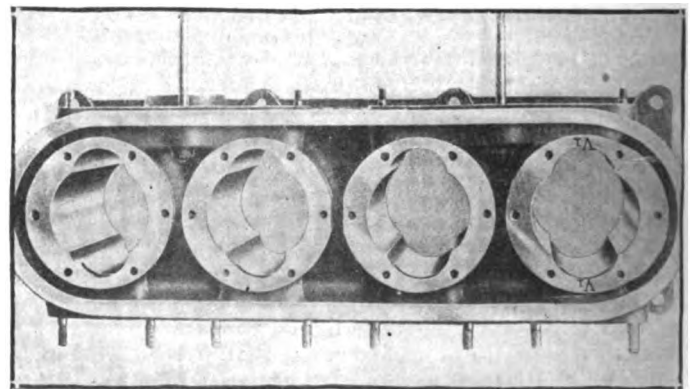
Showing the top of the casting of the Swiss slide-valve motor with the recesses in which the valves operate
